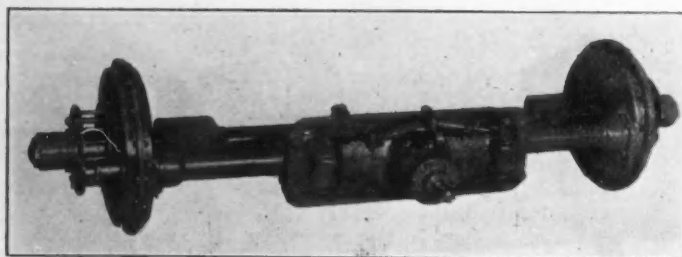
A 1-TON INTERNAL-GEAR AXLE HAVING A SOLID STEEL CARRYING MEMBER WITH THE DRIVING MECHANISM IN FRONT
